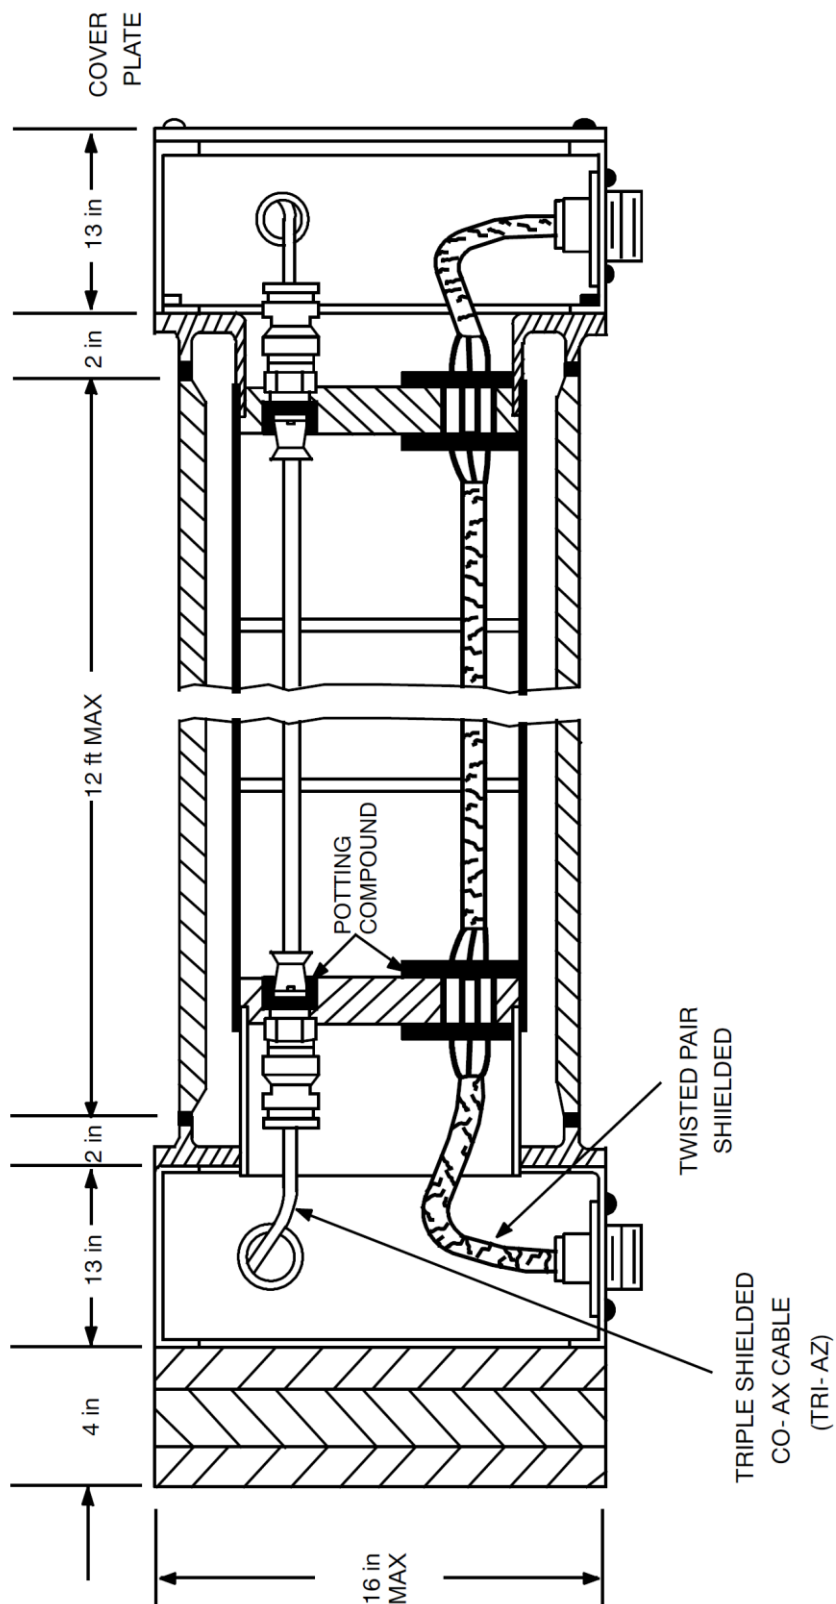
Center Section - High Voltage Power Electrical Penetration Assembly
